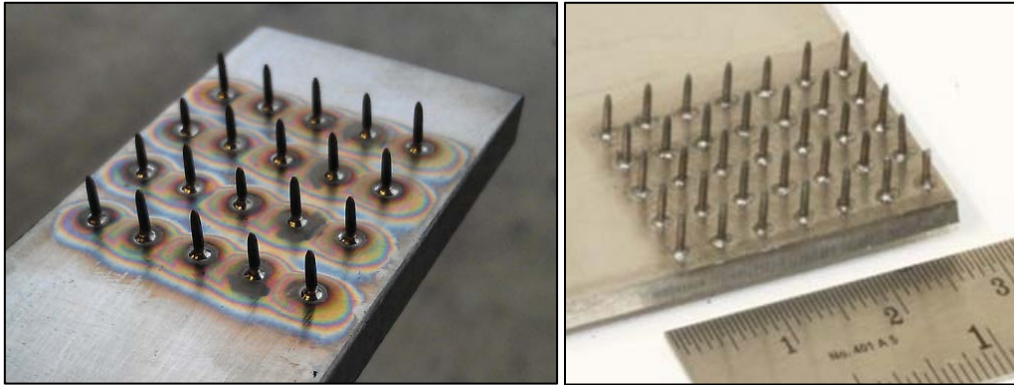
Measured CMT pike-head pin dimensions
